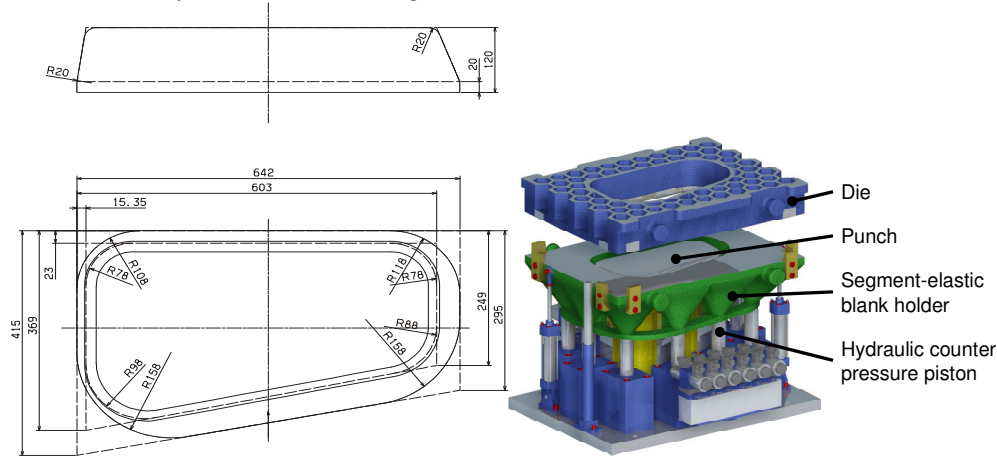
Dimensions of punch and deep-drawing die set with segment-elastic blank holder (Haeussermann, 2002)
